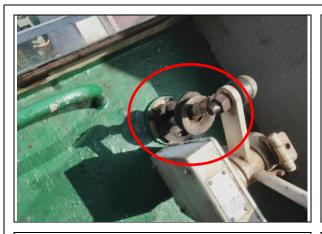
No.2&No.4 crane luffing gearbox oil black color
